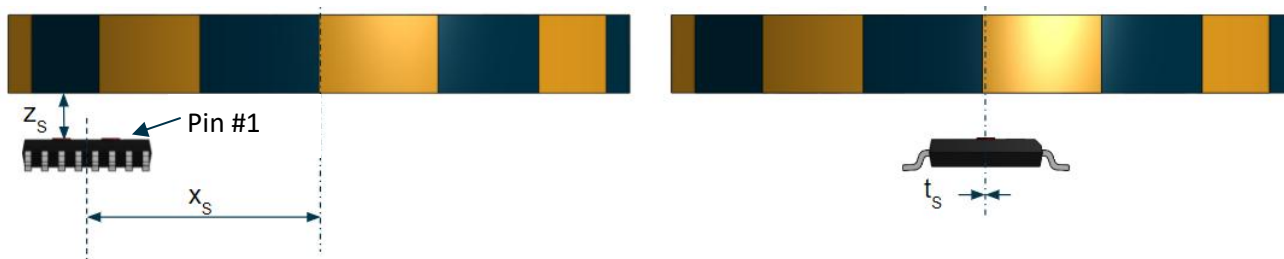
Assembly position of magnet and sensor chip. The chip is mounted with Pins #1 and 16 towards the ring center.
